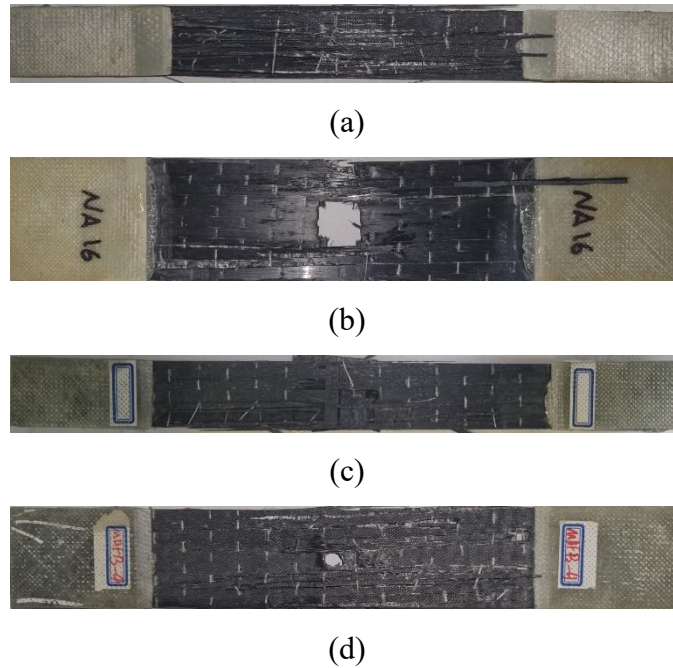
Specimens post-fatigue failure in pull-out mode: (a) plain, (b) cracked, (c) holed with  $\rho = 2.1$  mm, (d) holed with  $\rho = 3.25$  mm.
